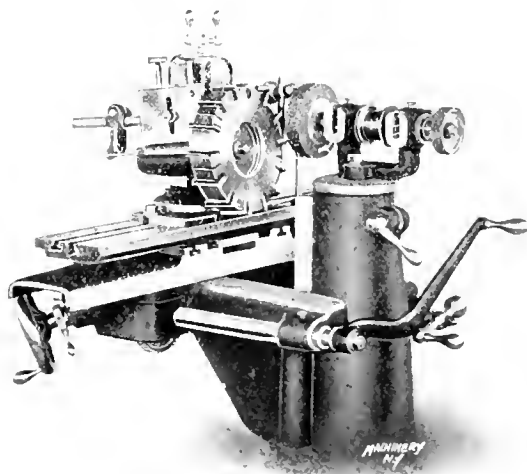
Grinding Face Mill—Taper Shank held in Universal Attachment.
